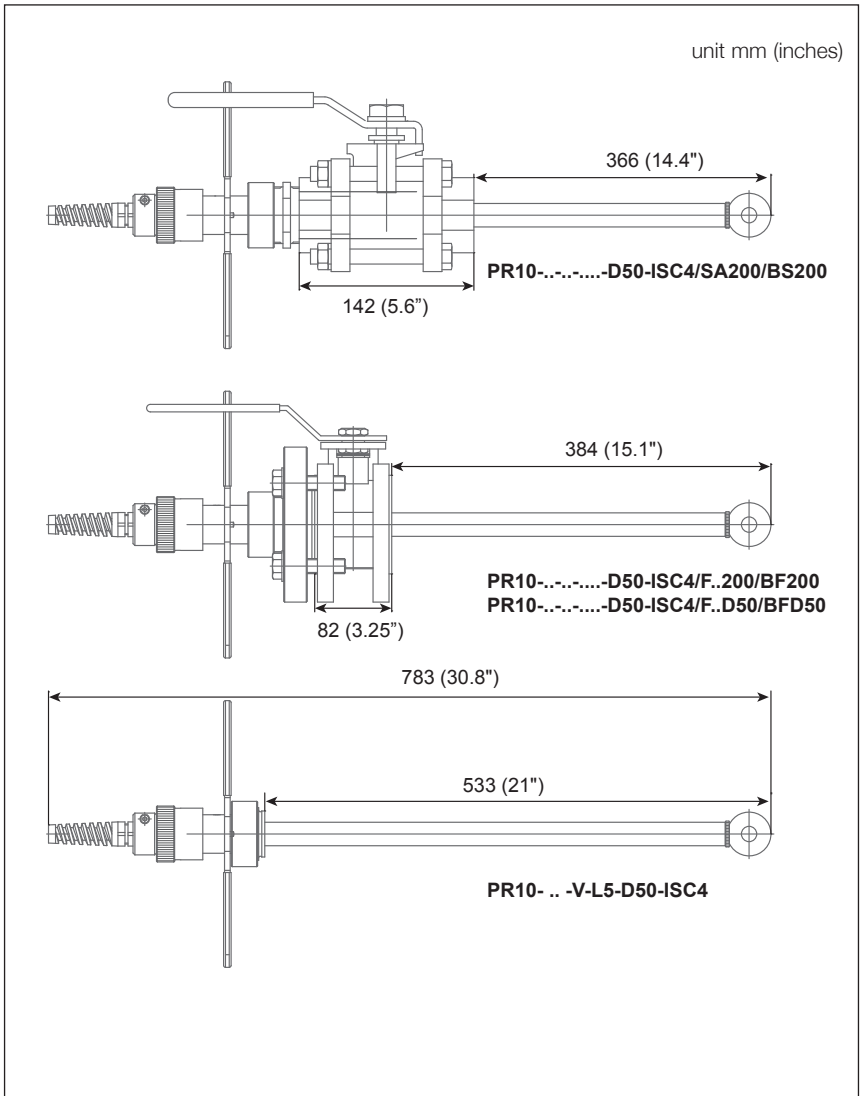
Dimensional drawing PR10...-D50 with mounted ISC40 sensor
